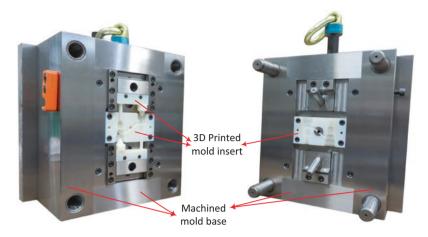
Standardized mold system and 3D printed mold inserts permitting rapid, low-cost prototypes. (Photo courtesy of HASCO) [10]
